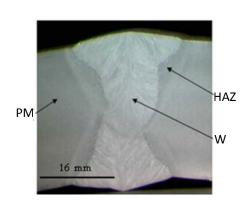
Sections of the weld (parent metal, heat affected zone and weld metal)
